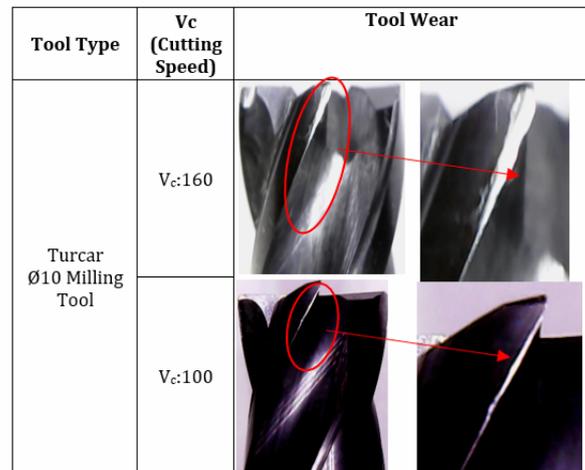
Tool wear for 45min. machining of $\varnothing 10$ Turcar
